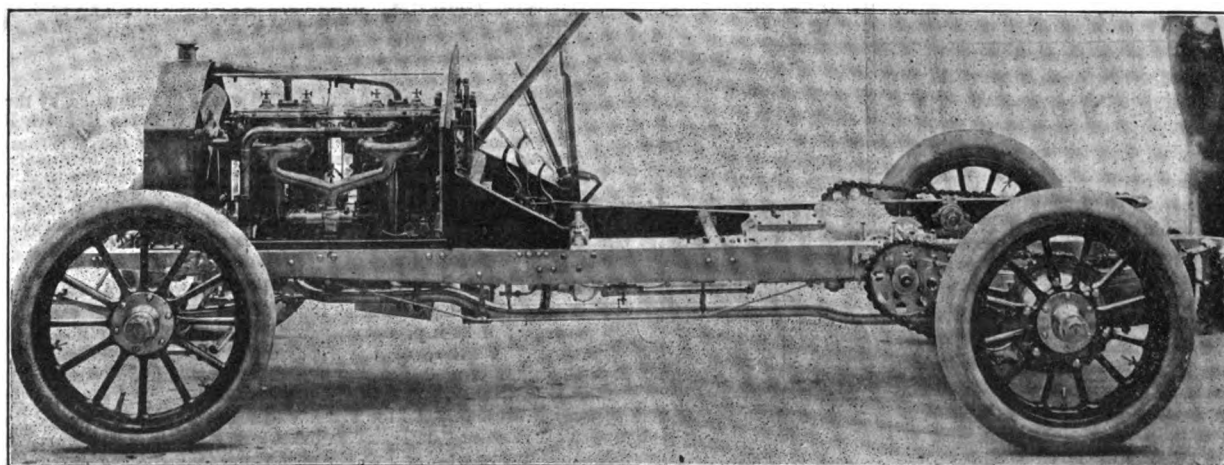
Chassis of 40-h.p. De Dietrich Car.
